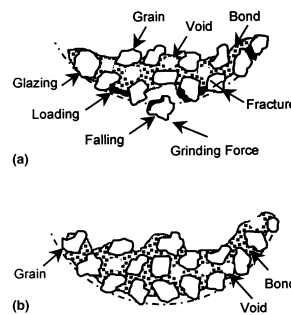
Schematic structures of wheel surface (a) Worn wheel, (b) dressed wheel[11]
